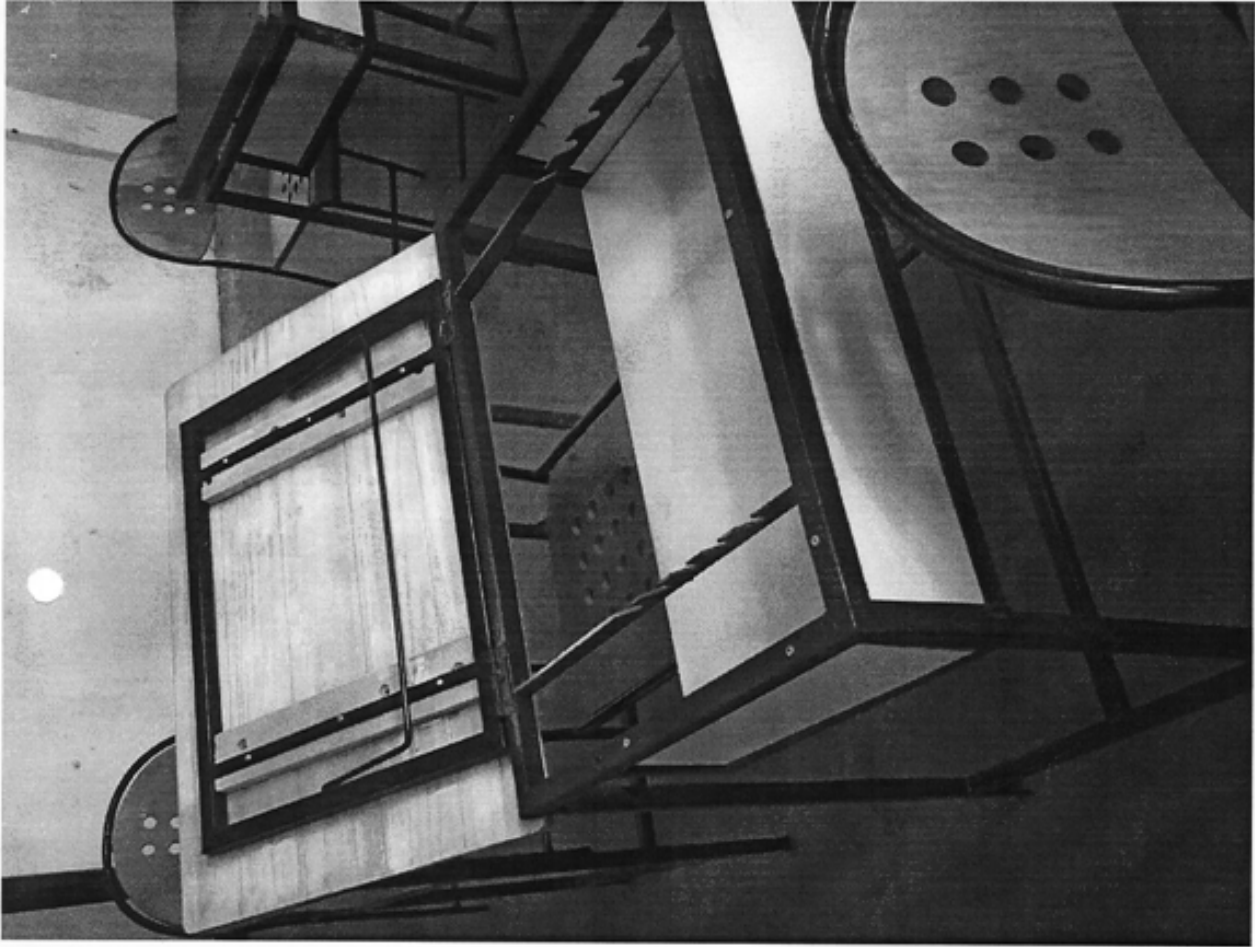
Assembled table view (Please ignore the nearby furniture)
